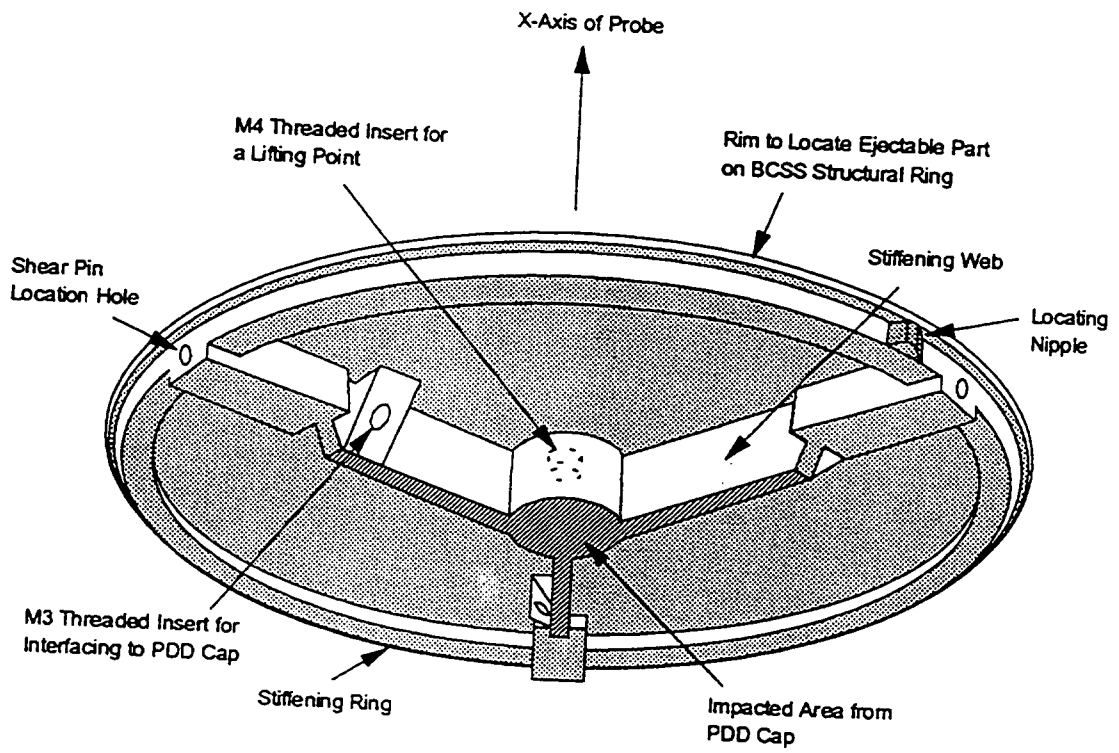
BREAK OUT PATCH EJECTABLE PART
